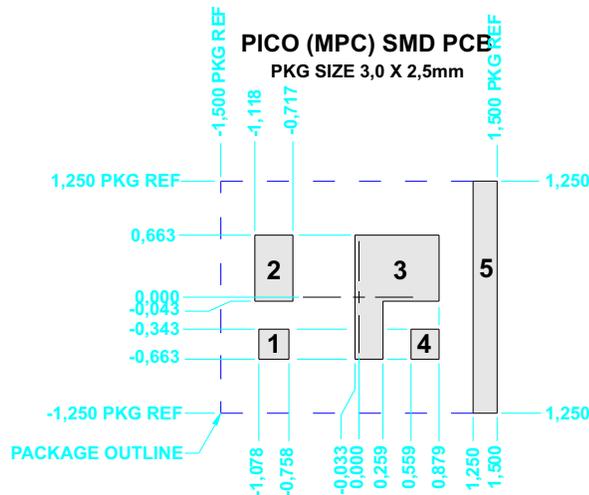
Pico (MPC) - Solder Mask Defined PCB Recommended Layout
